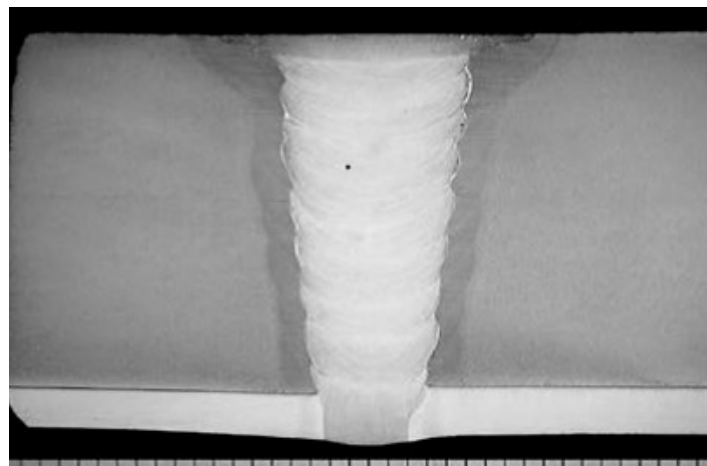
Mechanized PGTAW weld in clad pipes [3]
